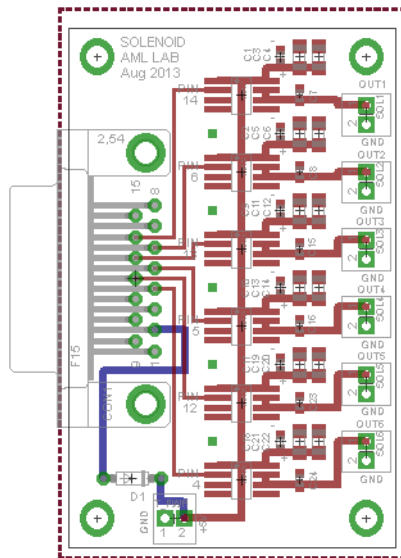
Board layout for the Solenoid Board circuit. The top layer of the board is in red, while the bottom layer is in blue. Silkscreen is presented in white. Image is actual size.
